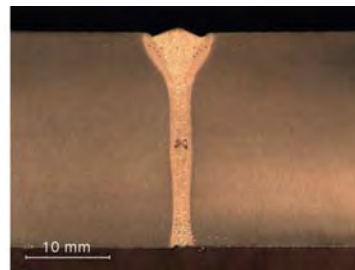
The macro sample of a 25mm specimen welded with laser hybrid welding. The weld quality is not approvable
